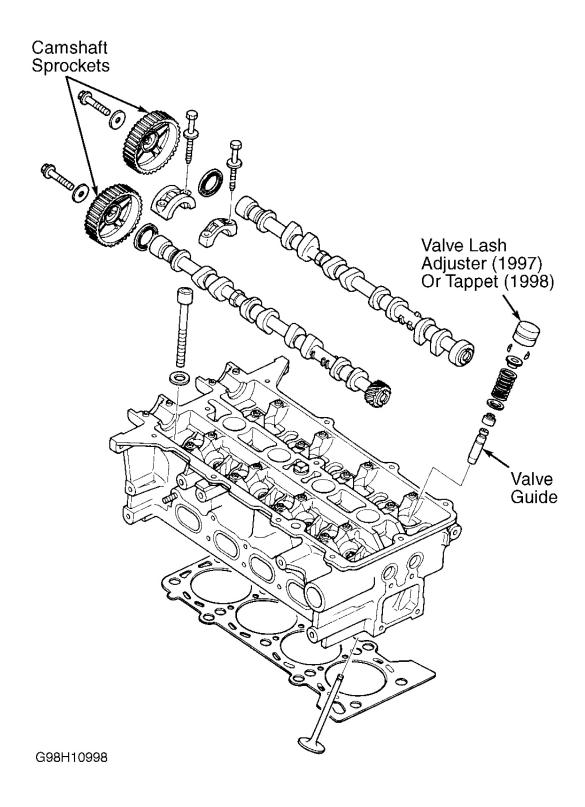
Exploded View Of Cylinder Head Assembly Courtesy of MAZDA MOTORS CORP.
